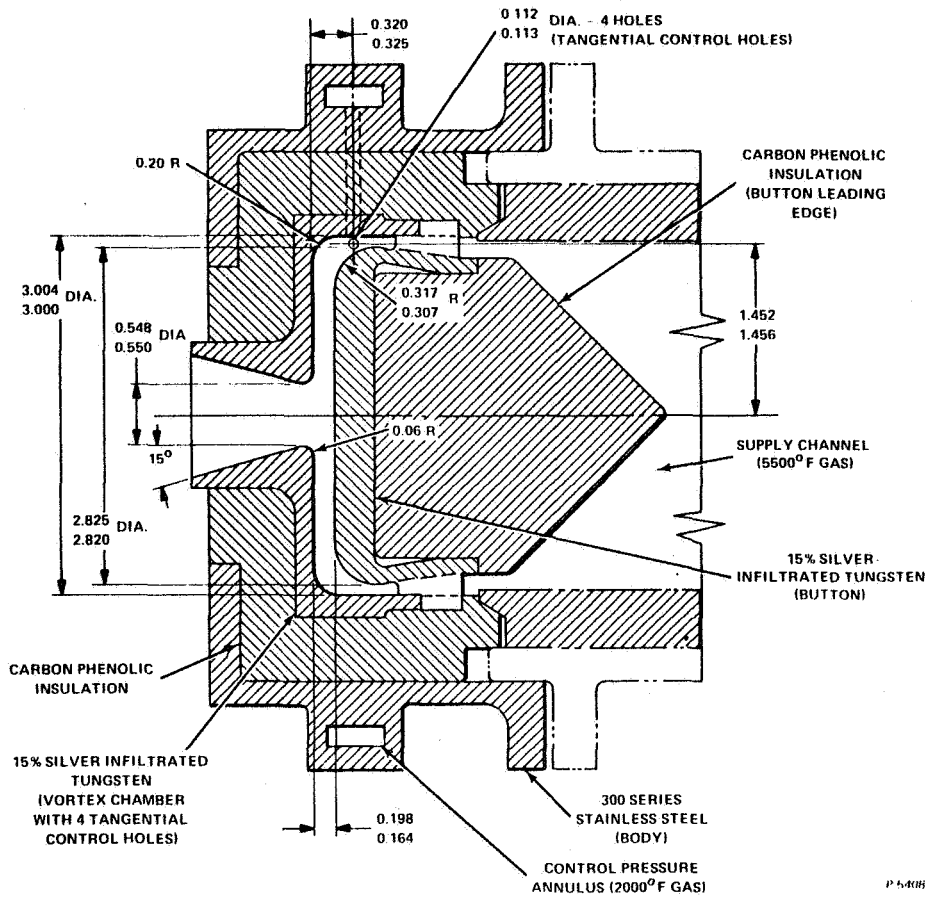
5500°F Vortex Valve Configuration, Basic Dimensions and Materials
